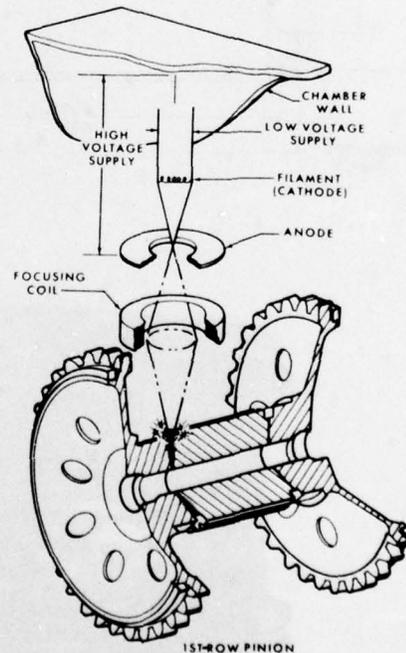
Electron-Beam Welding Schematic Representation.
